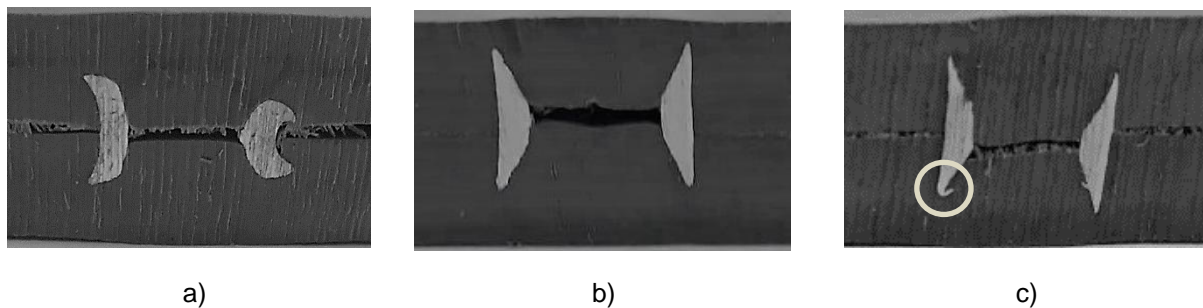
Failed joining tests: a) Rivet irregularly collapsed; b) Rivet with no flaring; c) Rivet with “fishhook” defect.
